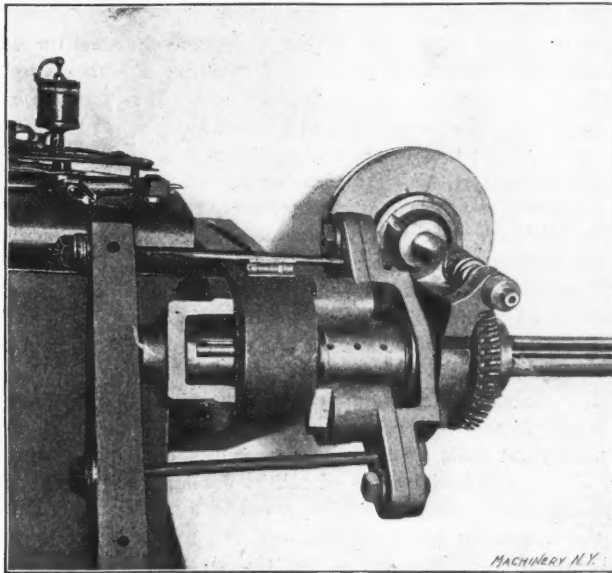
Bar Rigged for Boring an Engine Crank for the Crank Pin.
